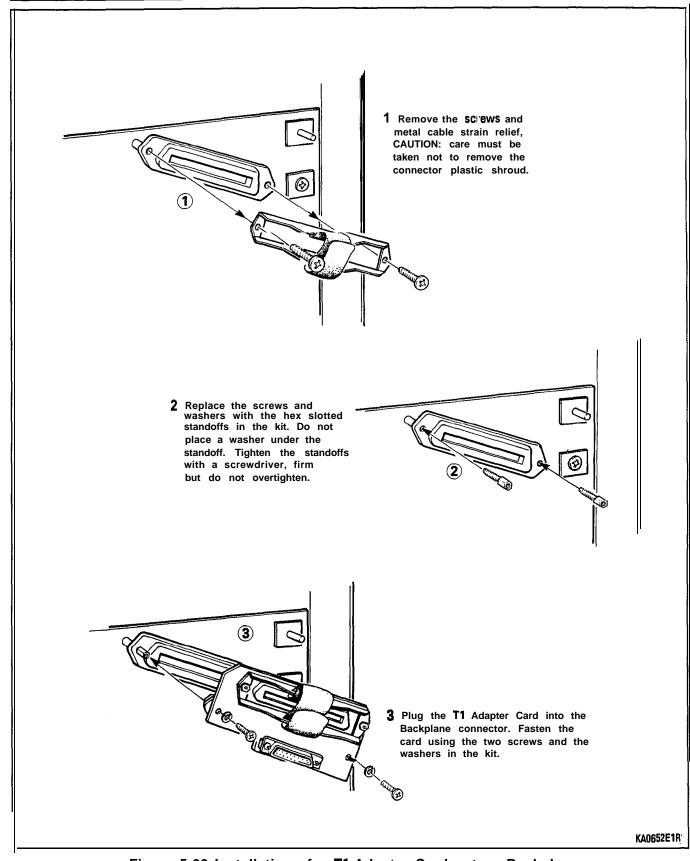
Installation of a T1 Adapter Card onto a Backplane
